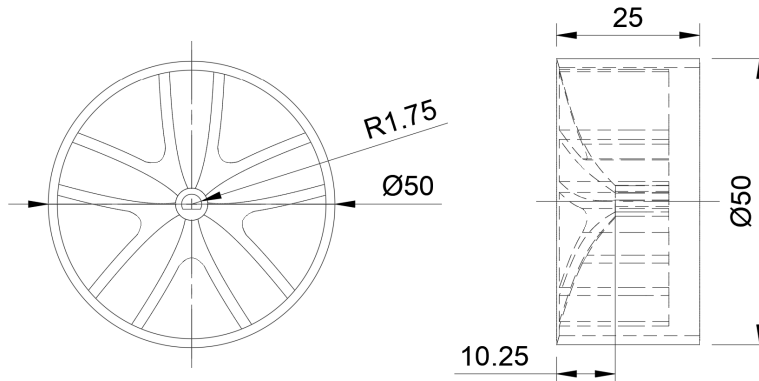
Wheel dimension diagram for the 3D printed wheels. Made by Franklin
